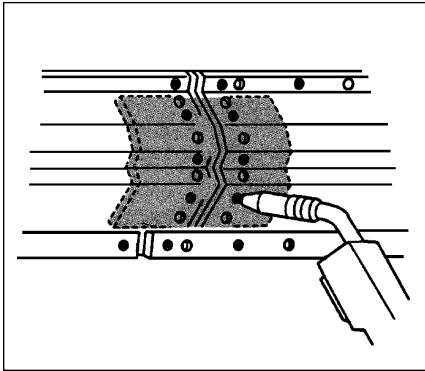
Inserts provide joint reinforcement, especially when combined with plug welds. (Courtesy of GM)
